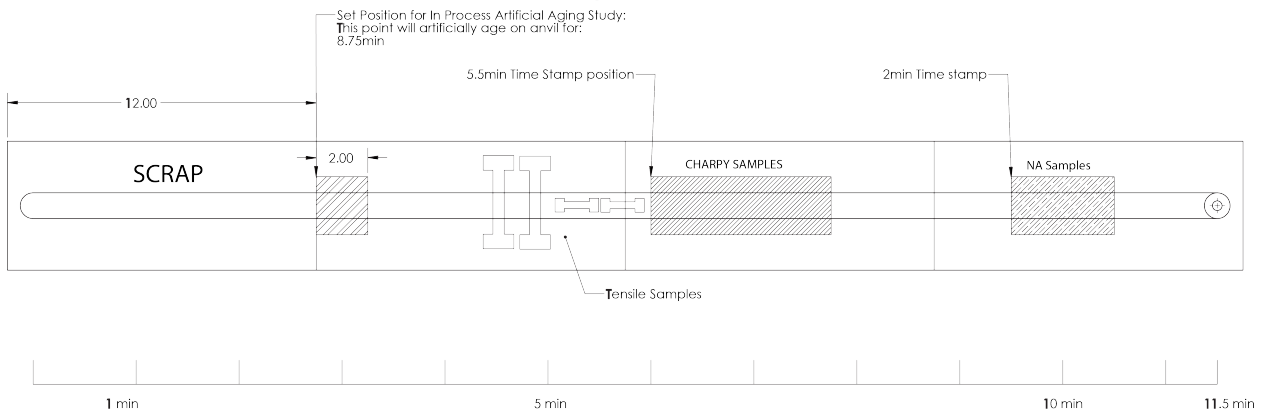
Sample removal diagram for welds ran at 100 mm/min
